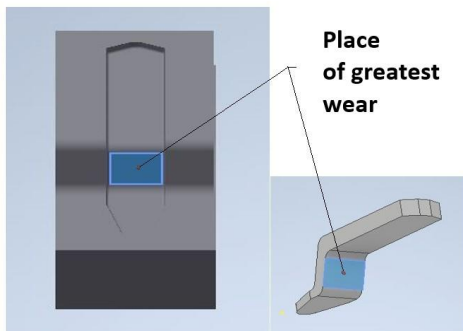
Place of greatest wear of the lower insert of the die during the forging of the contactor forging on the hammer and the corresponding place on the forging
